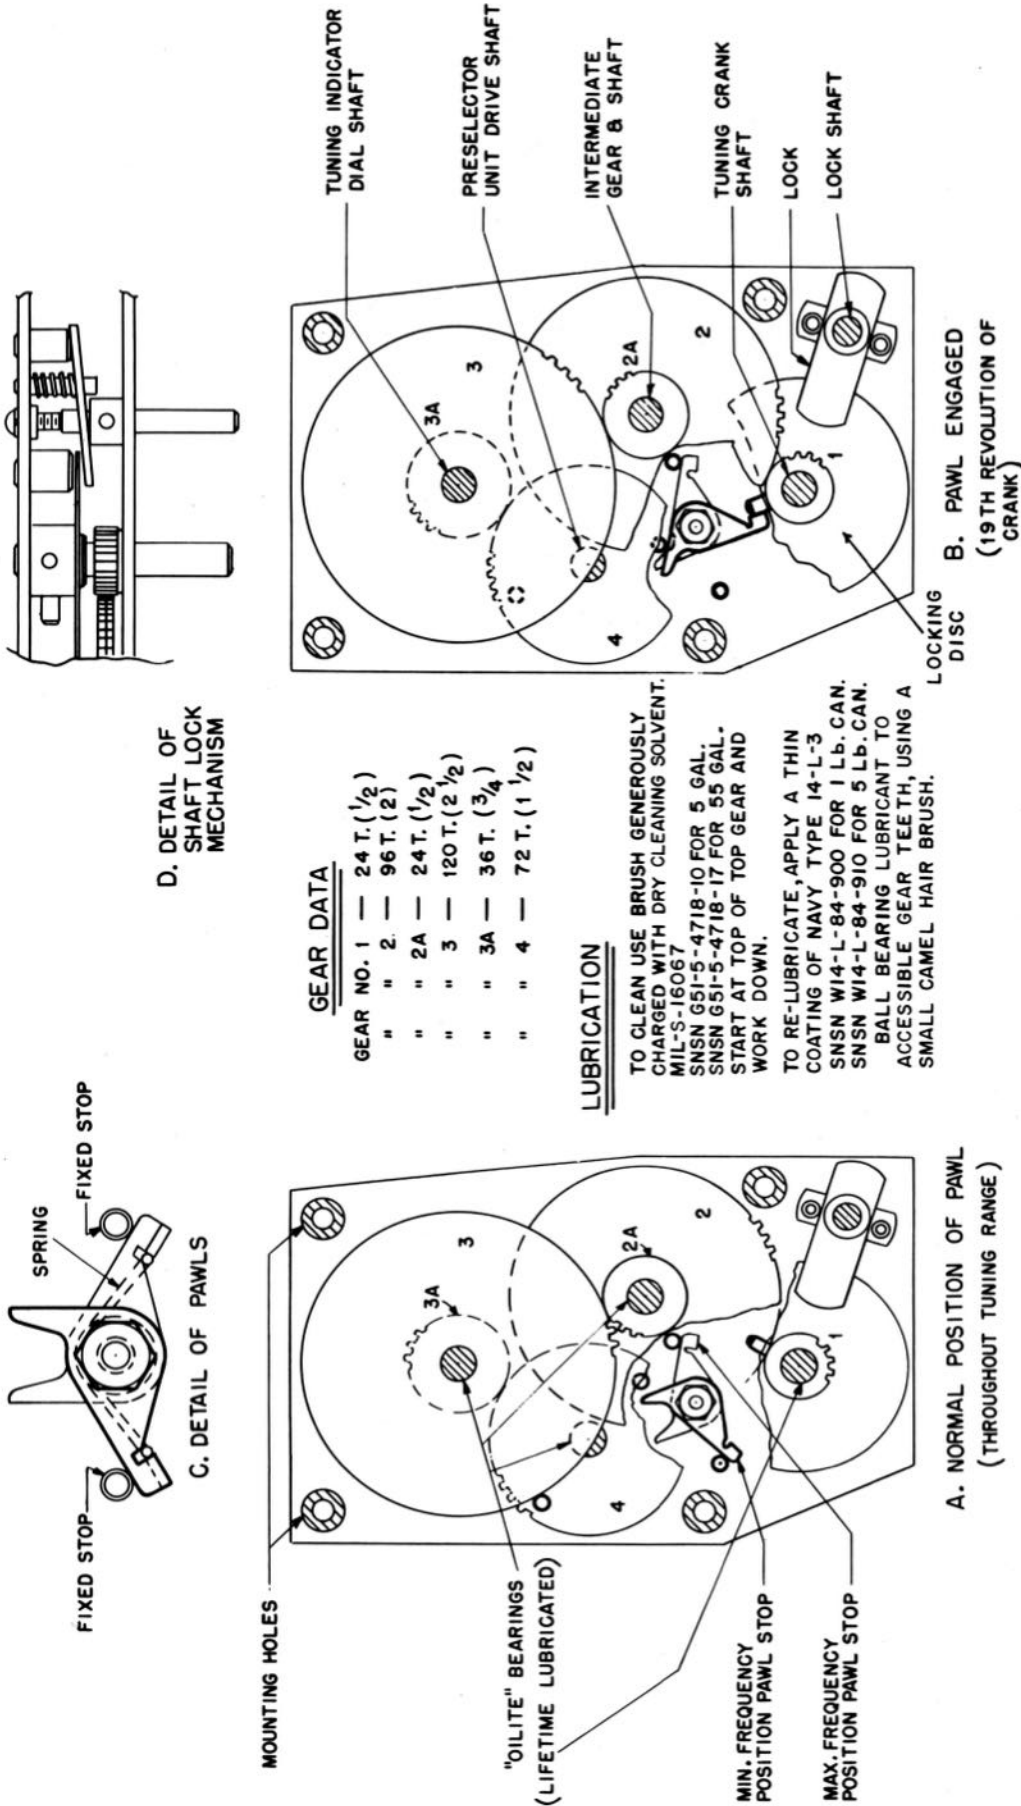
Details of Dial Drive Mechanism for Preselector Unit, Showing Automatic Stop Device
